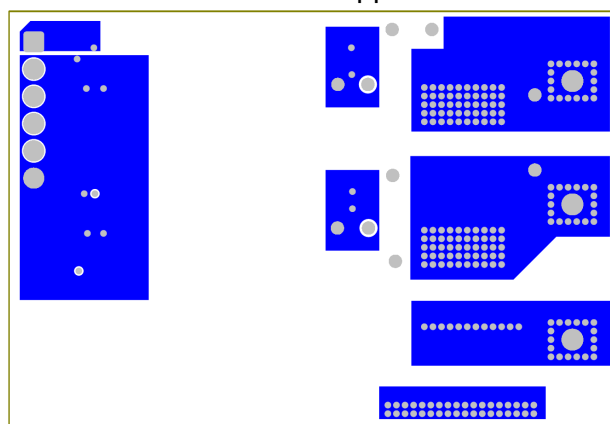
APEK85000-GEJ-01-T PCB Copper Layers
